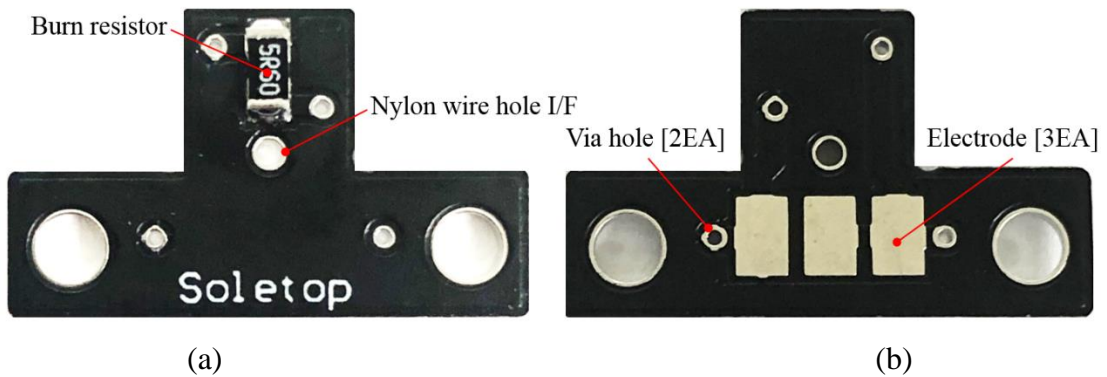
Mechanical Configuration of Burn Resistor PCB: (a) Front View and (b) Rear View.
